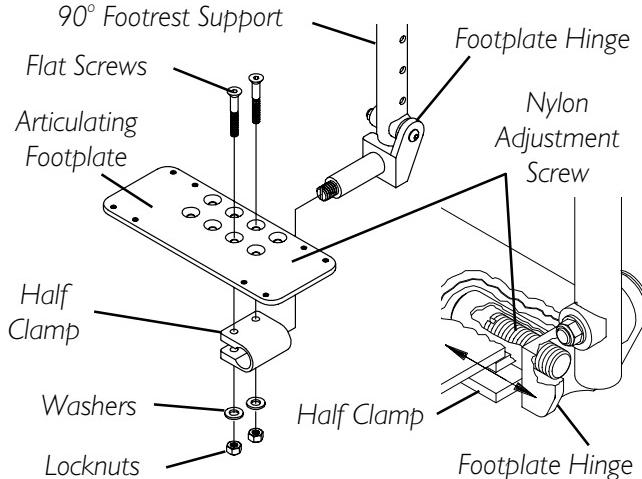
INSTALLING/ADJUSTING ADJUSTABLE ANGLE FLIP-UP FOOTPLATES
